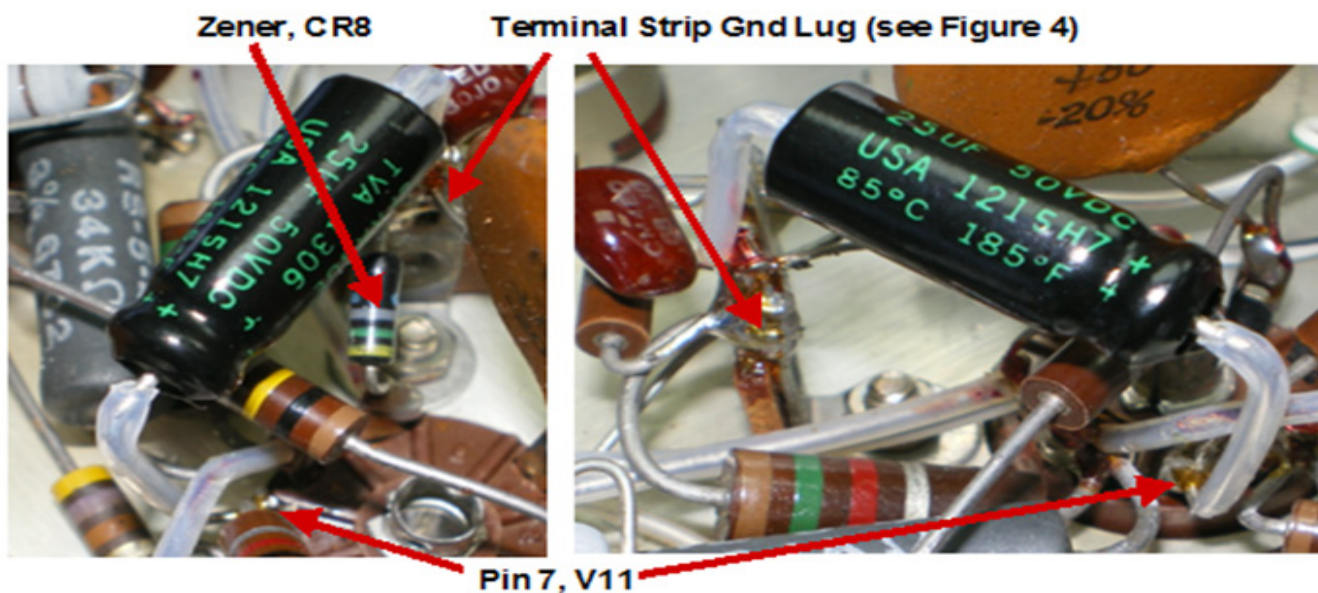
C6B Installed Between Pin7 of V11 (+) to the Terminal Strip GND Lug (-).
